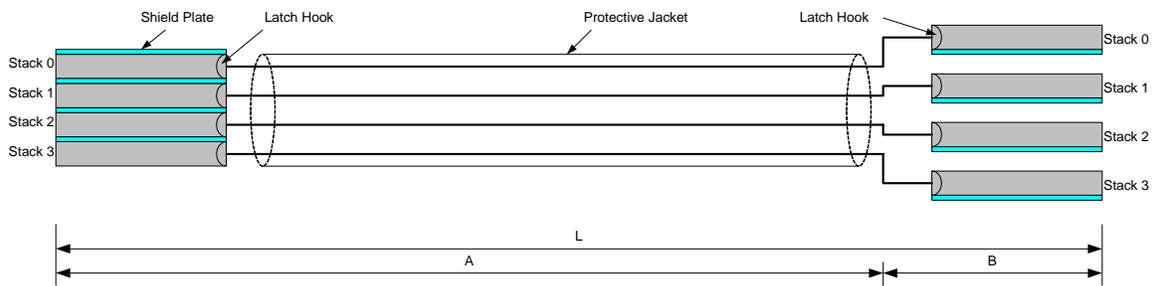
1 Side view of the “Long” HM Gbps cable assembly (i.e. viewed from the side of the latch hook). On the SDFB side, 4 stacks of the HM cables are combined together and plugged into the SDFB backplane. On the Station Board side, 4 stacks will be split and plugged into 4 Station Board backplanes.
